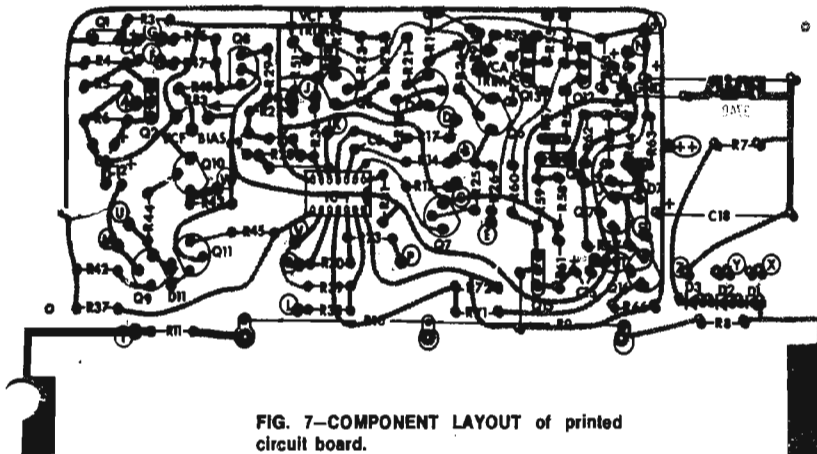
COMPONENT LAYOUT of printed circuit board.
